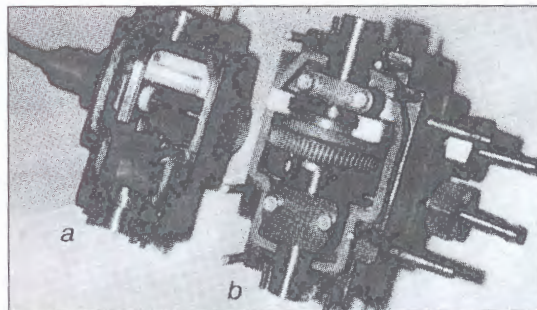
Chambers for welding niobium alloy tubing of $\varnothing 12 \times 1$ (a) and $\varnothing 28 \times 1$ (b) mm size, shown with the removed covers
